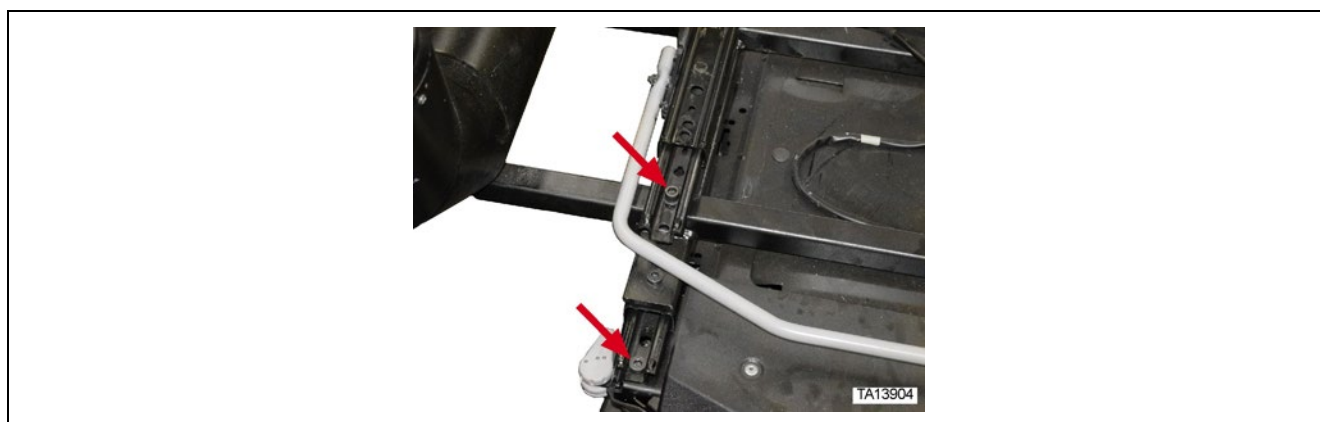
Allen-head screw at each corner of assembly securing spindle & pod
